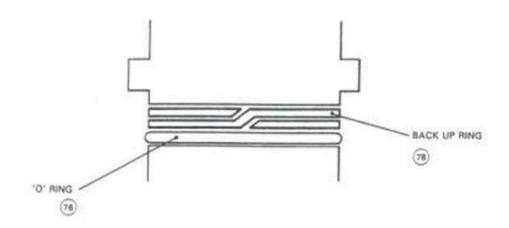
Inlet Valve Seat – Back Up Ring and 'O' Ring Fitting
